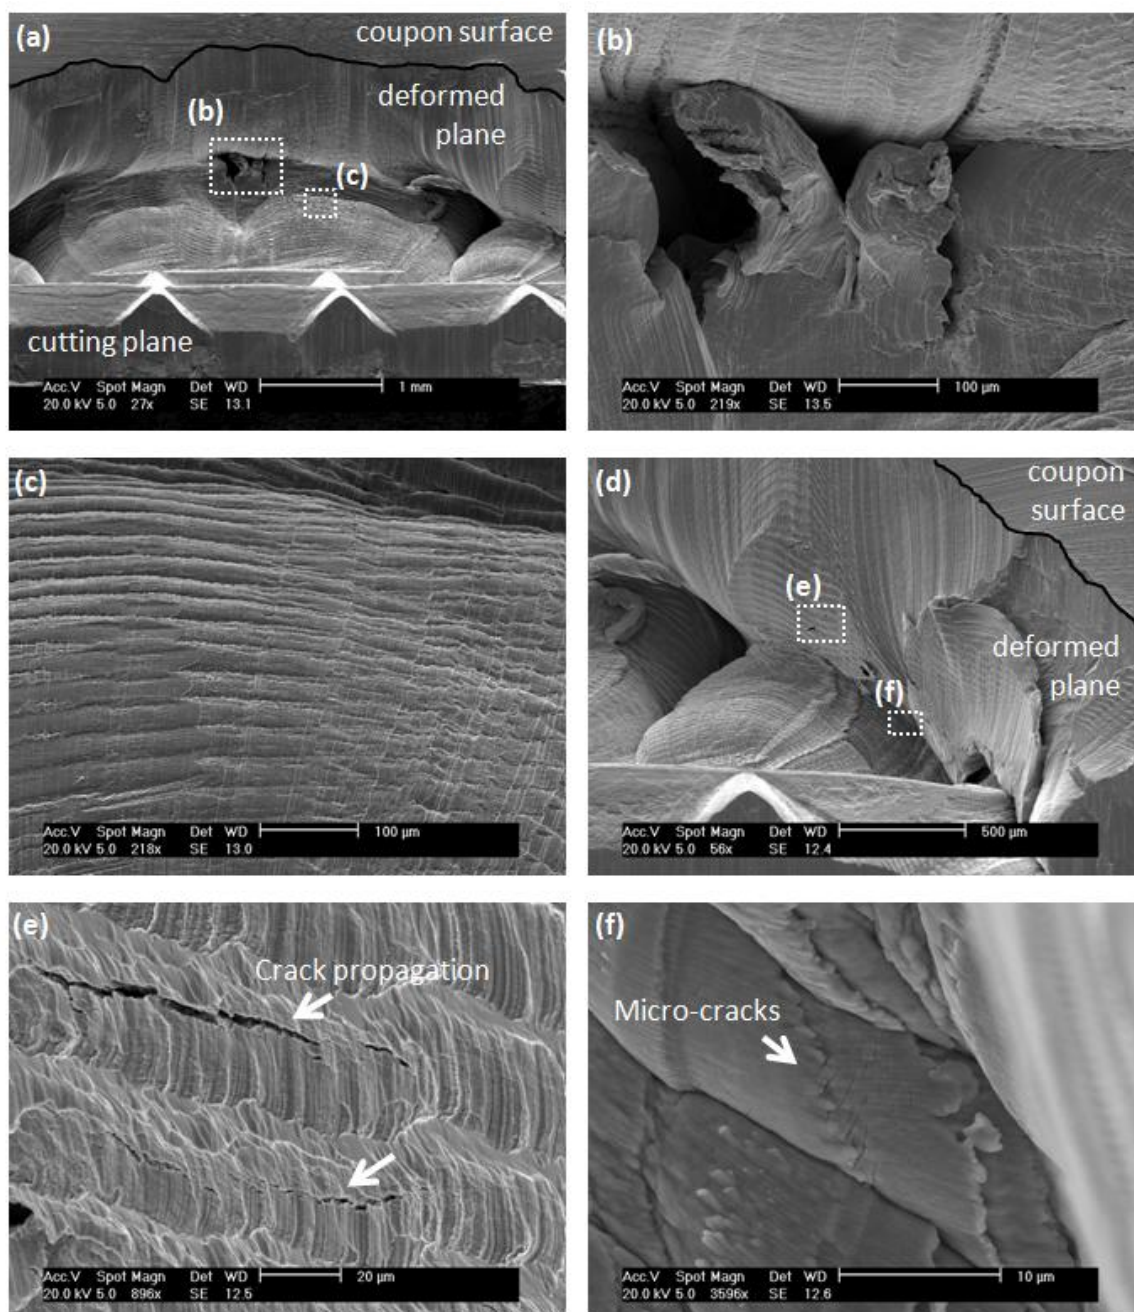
SEM images of deformed surfaces around the weld zone from the ‘over’ weld: (a) a front view image (vibration direction: out-and-in-plane); (b) ‘island’ features; (c) fatigue striation marks; (d) another front view image of the right hand side of image-(a); (e) crack propagations; (f) micro-cracks
